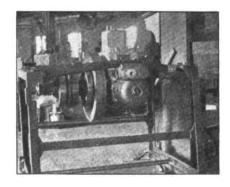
A SPECIAL FRAME FOR HOLDING MOTOR
